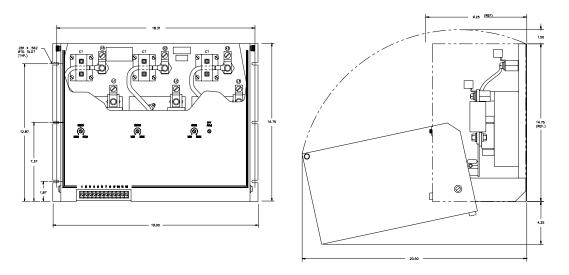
Front, Cutaway and Side Views of a Typical 25A to 225A 3PCI Controller
